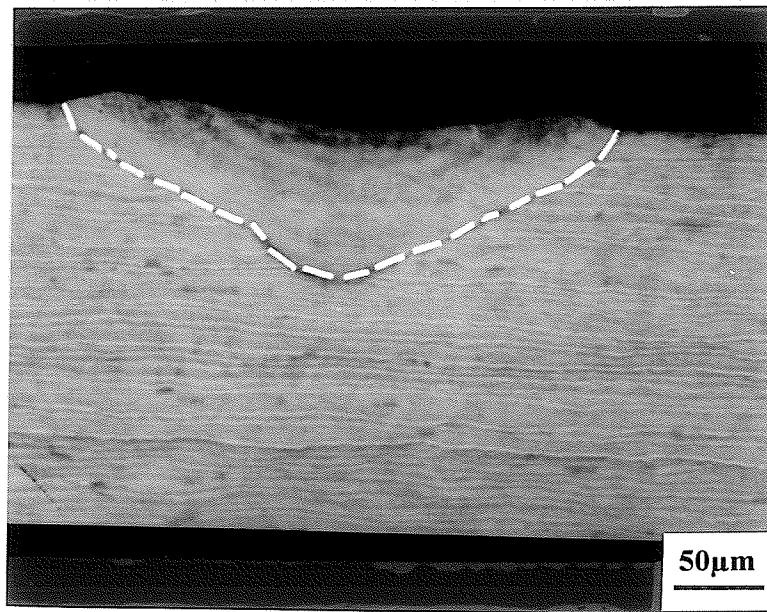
A cross section of laser weld. Power=90W, Speed=0.10cm/sec.
